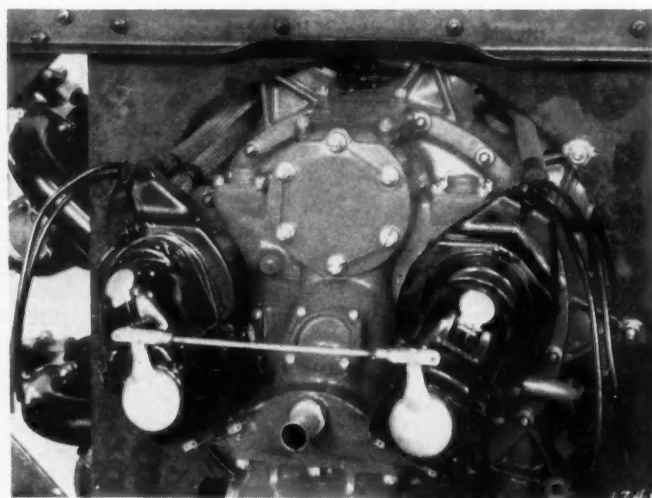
REAR VIEW OF THE ENGINE SHOWN IN FIG. 9
